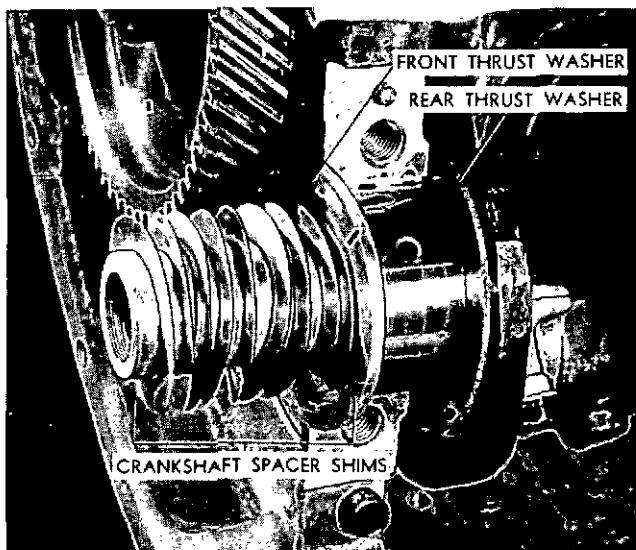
Thrust Washers & Shims Controlling Crankshaft End Play\* (Z Series)
